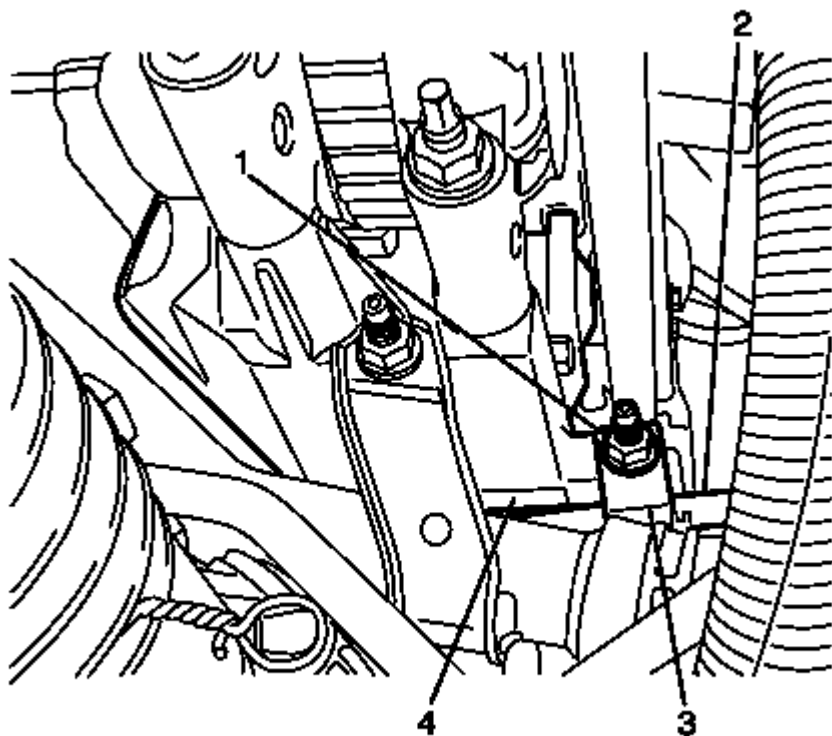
Identifying Upper Intake Manifold - Rear
